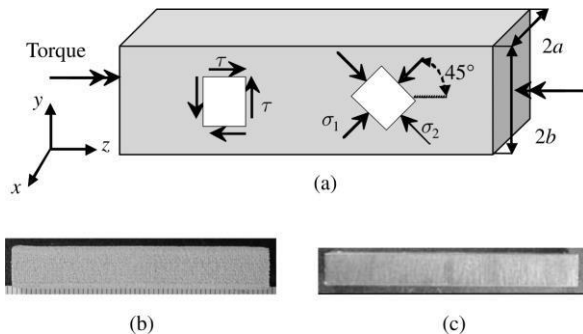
Torsional fatigue test: (a) stress field during torsion test, (b) as-formed specimen (each division is 1 mm) and (c) machined
